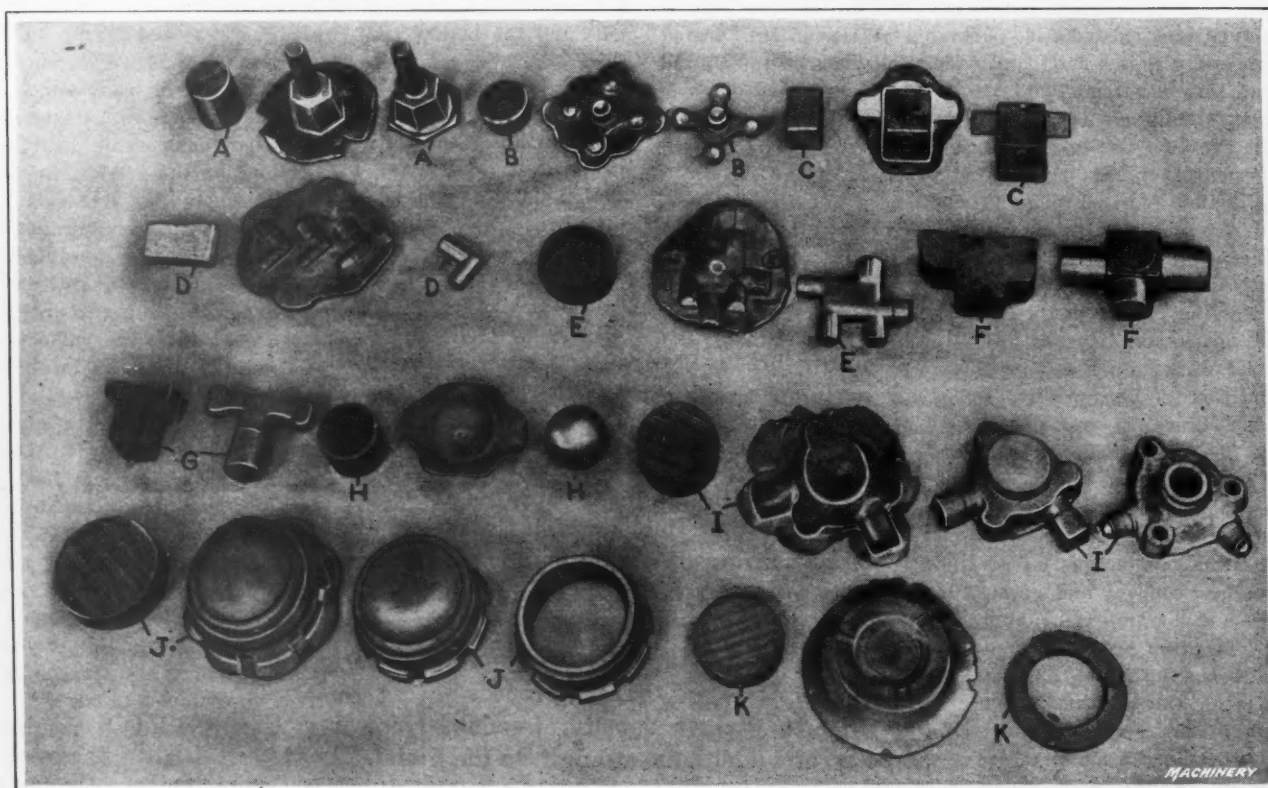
Groups of Parts comprising the Metal Blank, the Forging as it leaves the Die, and the Finished Work after trimming off the Flash
